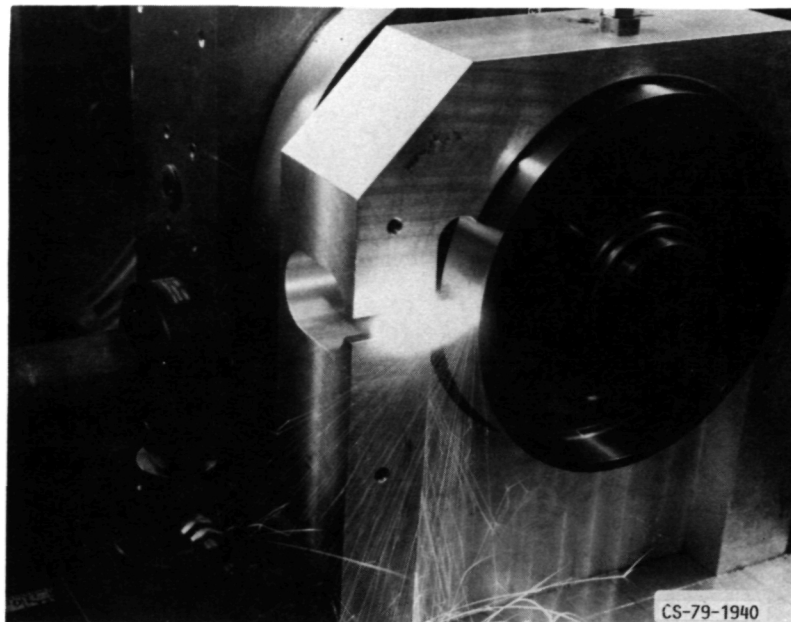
LASER REMOVING METAL FROM TEST ROTOR.
